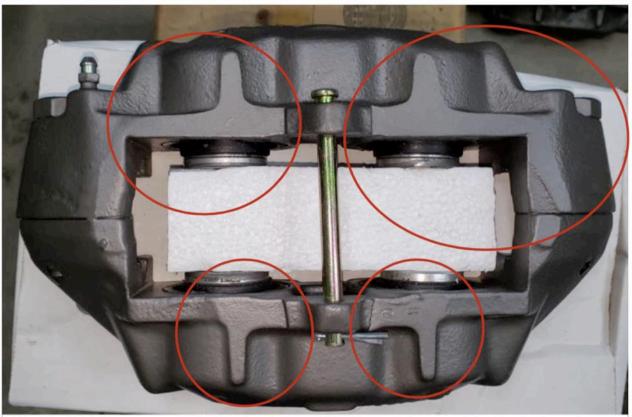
RF Caliper top view. Red circles show machined areas adjacent of the disc brake pads retaining pin.
